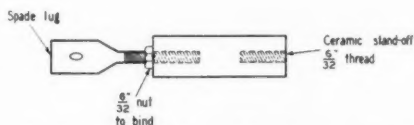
A "pee-wee" screwdriver that you can make from parts out of your junk box. It's just right for getting into those tight corners.
